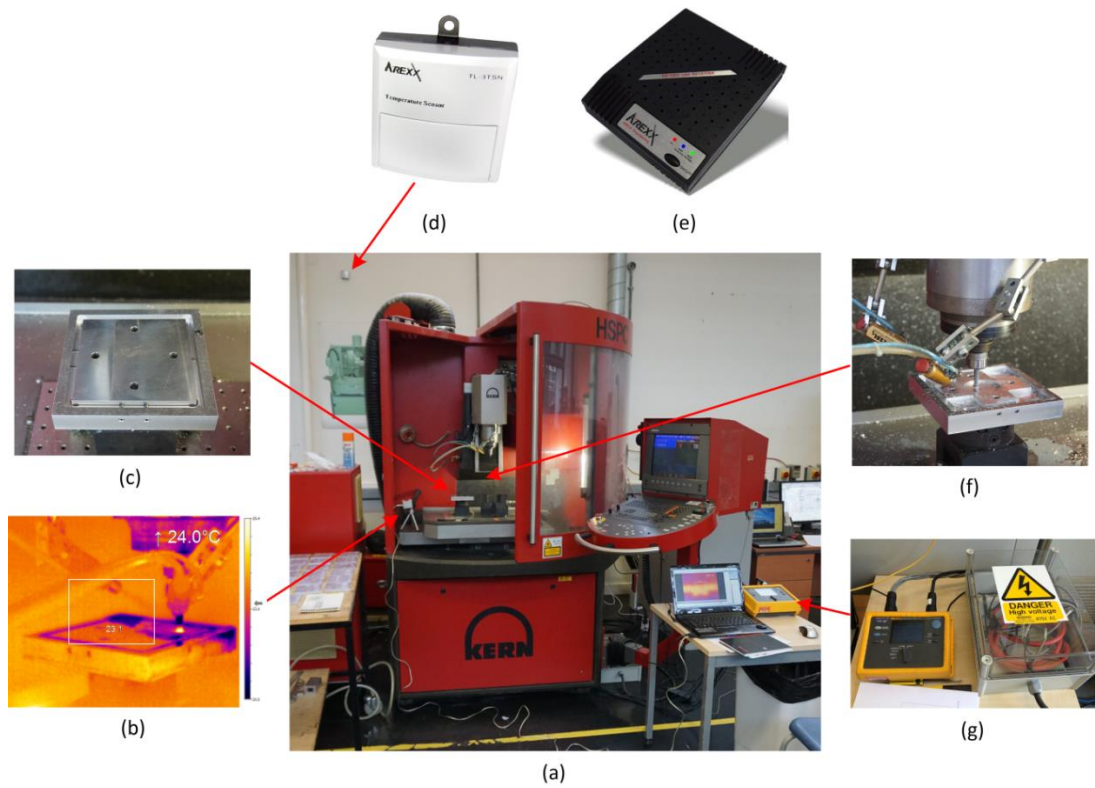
Precision milling experimental process: (a) Kern CNC milling machine, (b) thermal camera user interface, (c) aluminium block experimental setup, (d) temperature sensor, (e) LAN based receiver, (f) aluminium machining, and (g) power logger
